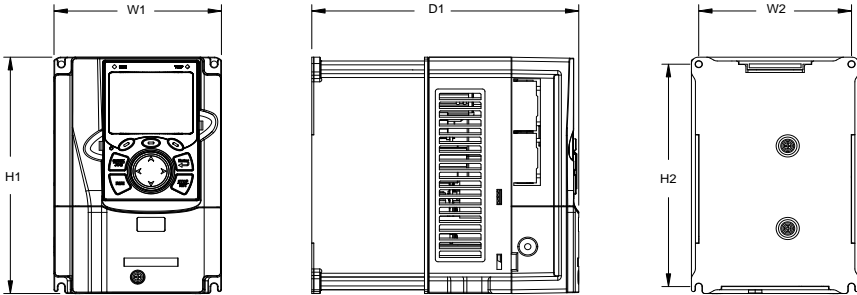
Wall installation diagram of VFDs of 575V 0.75–18.5kW
